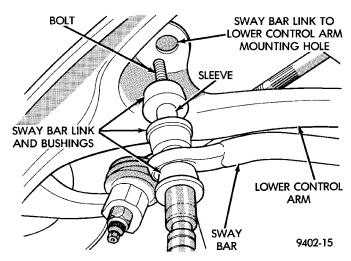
Stabilizer Bar Link To Control Arm Attachment
